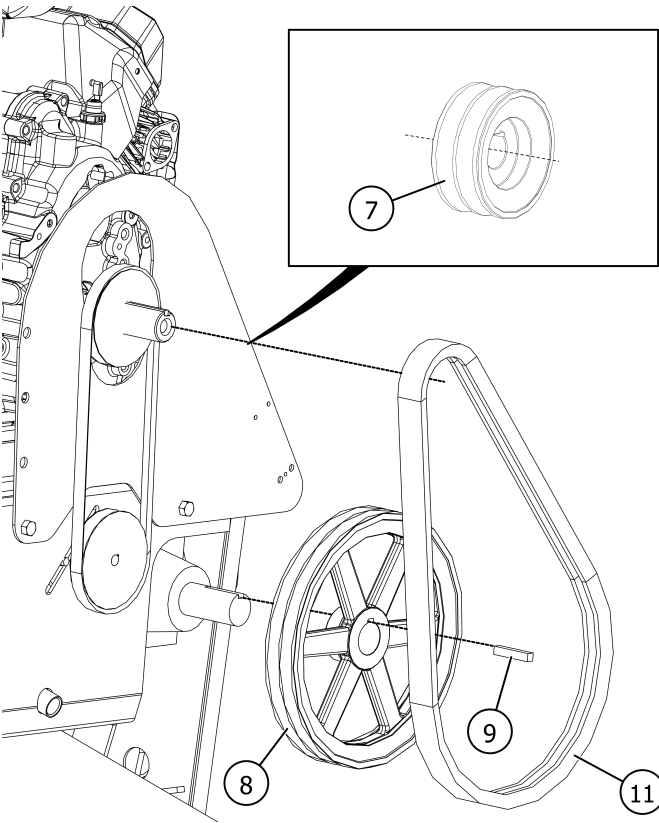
Installing the Pulleys and Belts to the Motor Shaft and Gearbox
